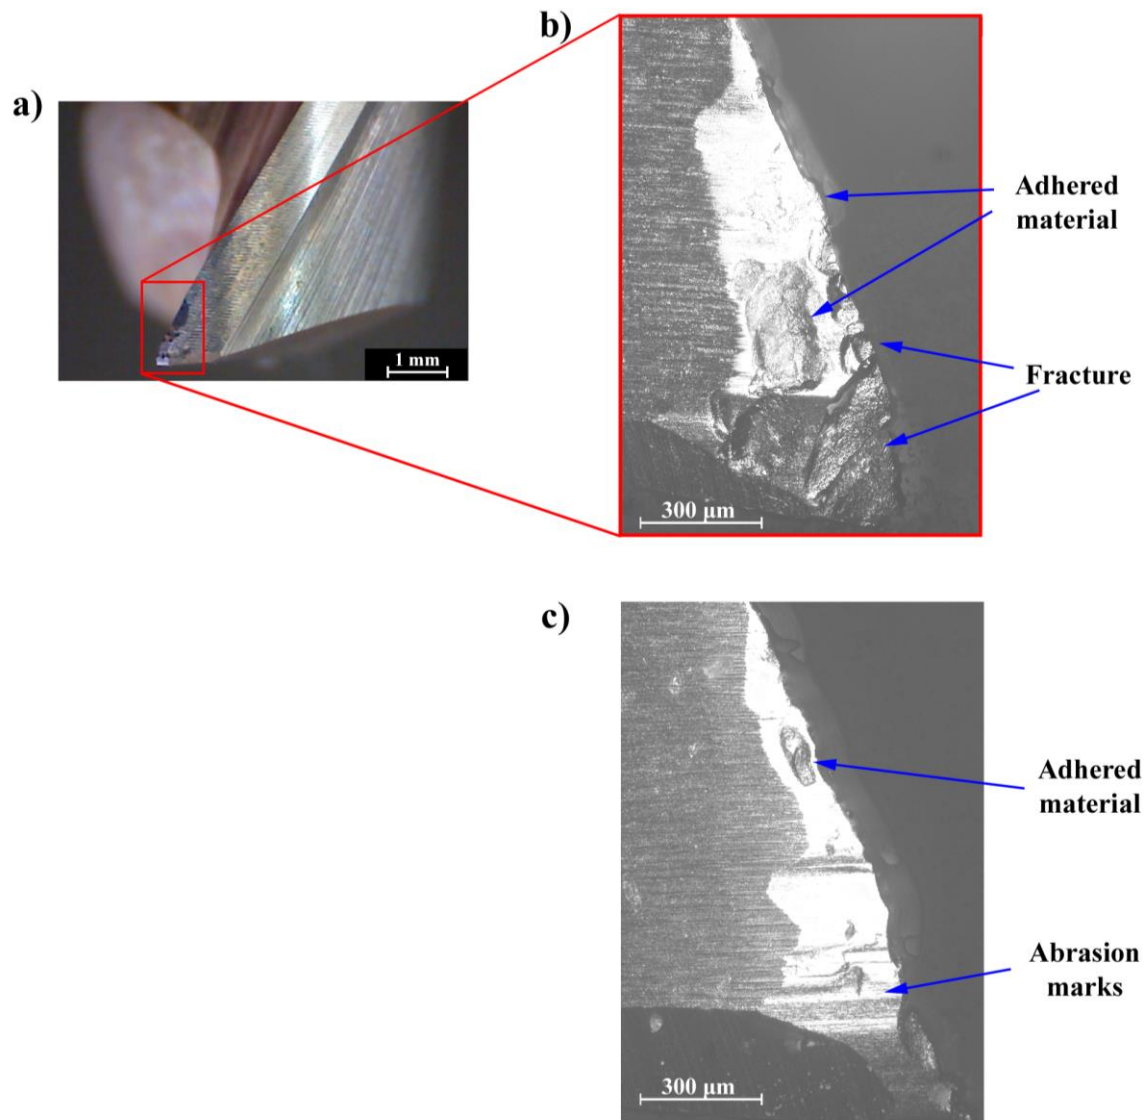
Major flank face after experiment 12: a) Tool wear resultant from machining the high heat input samples and b) detail of the corresponding view; c) Detailed view of the tool wear resultant from machining the low heat input samples
